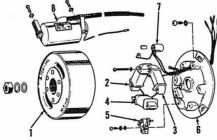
Exploded view of the ignition and electrical system flywheel assembly. Ignition coil (8) is located inside frame under the fuel tank.
